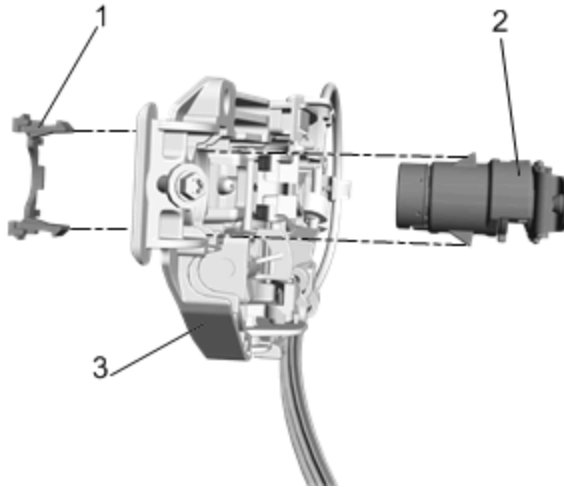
Lock Cylinder Retainer, Lock Cylinder And Handle Bracket
